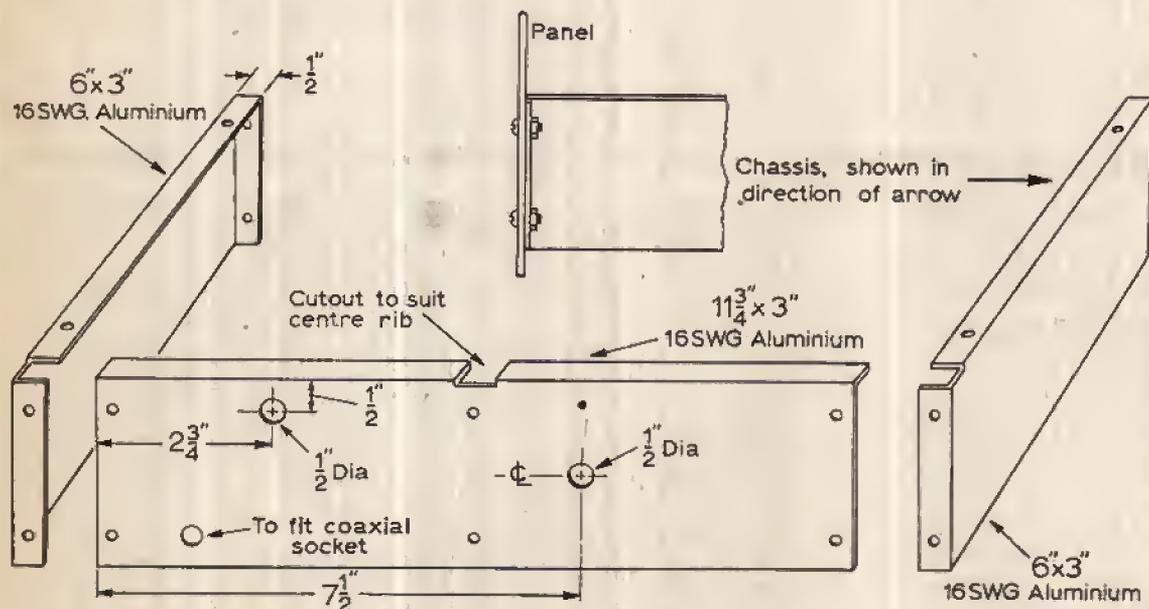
Exploded view of chassis members. Note that panel extends below the bottom of the chassis, see Fig. 6. Part One. Since the rear member carries only the coaxial socket it can be left off until all wiring and constructional work is completed.
